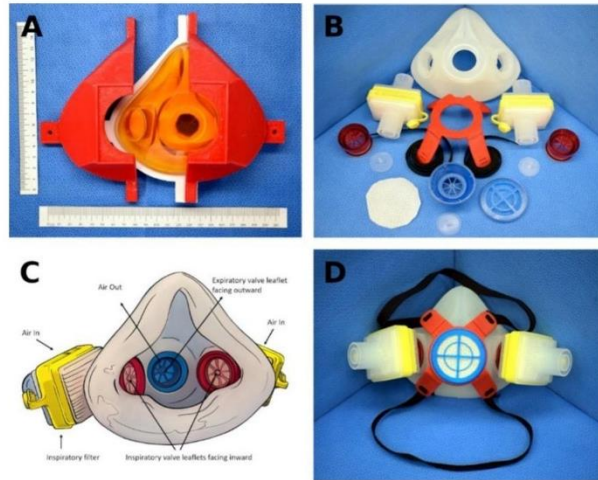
Production process of the Duo silicone respirator. A) The 4-part 3D-printed mold B) Complete set of components C) Valve assemblies D) Assembled Duo respirator.
